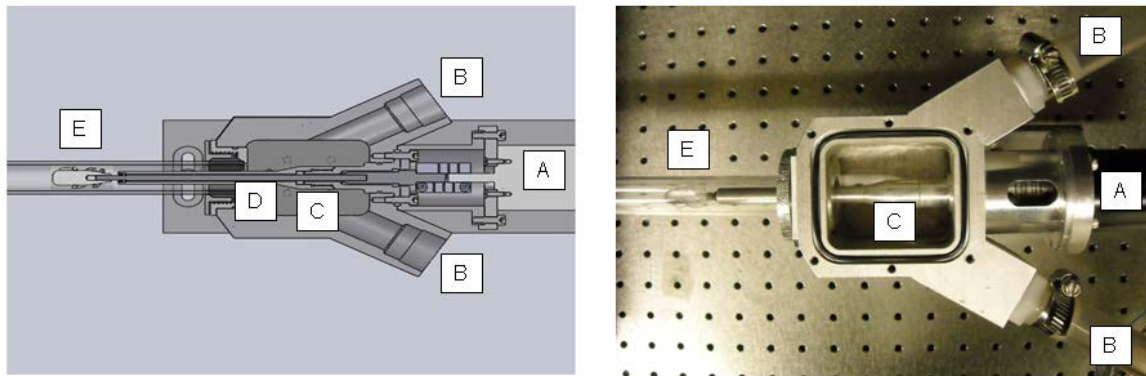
Pump housing: Left: Solidworks CAD model; Right: Constructed Piece; Components are: A) motor, B) inlet connection, C) shaft sleeve, D) shaft, E) impeller
